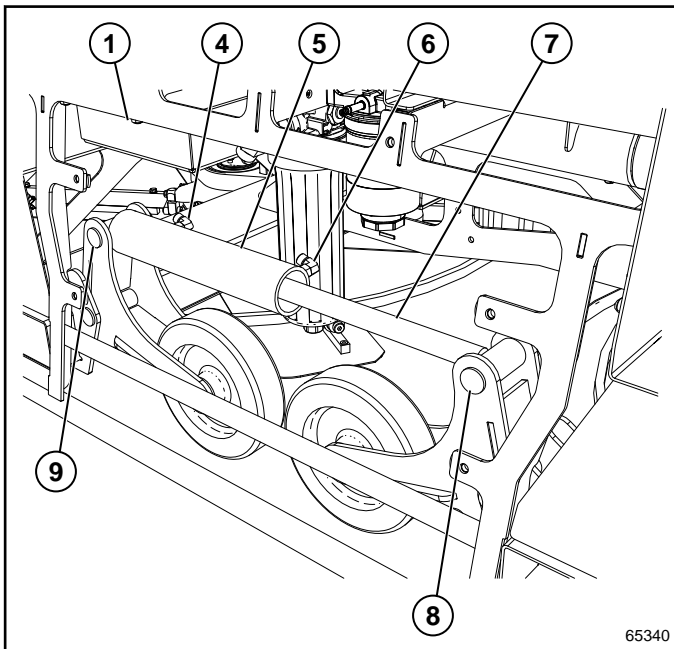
Wheel Kit Cylinder Removal and Installation
